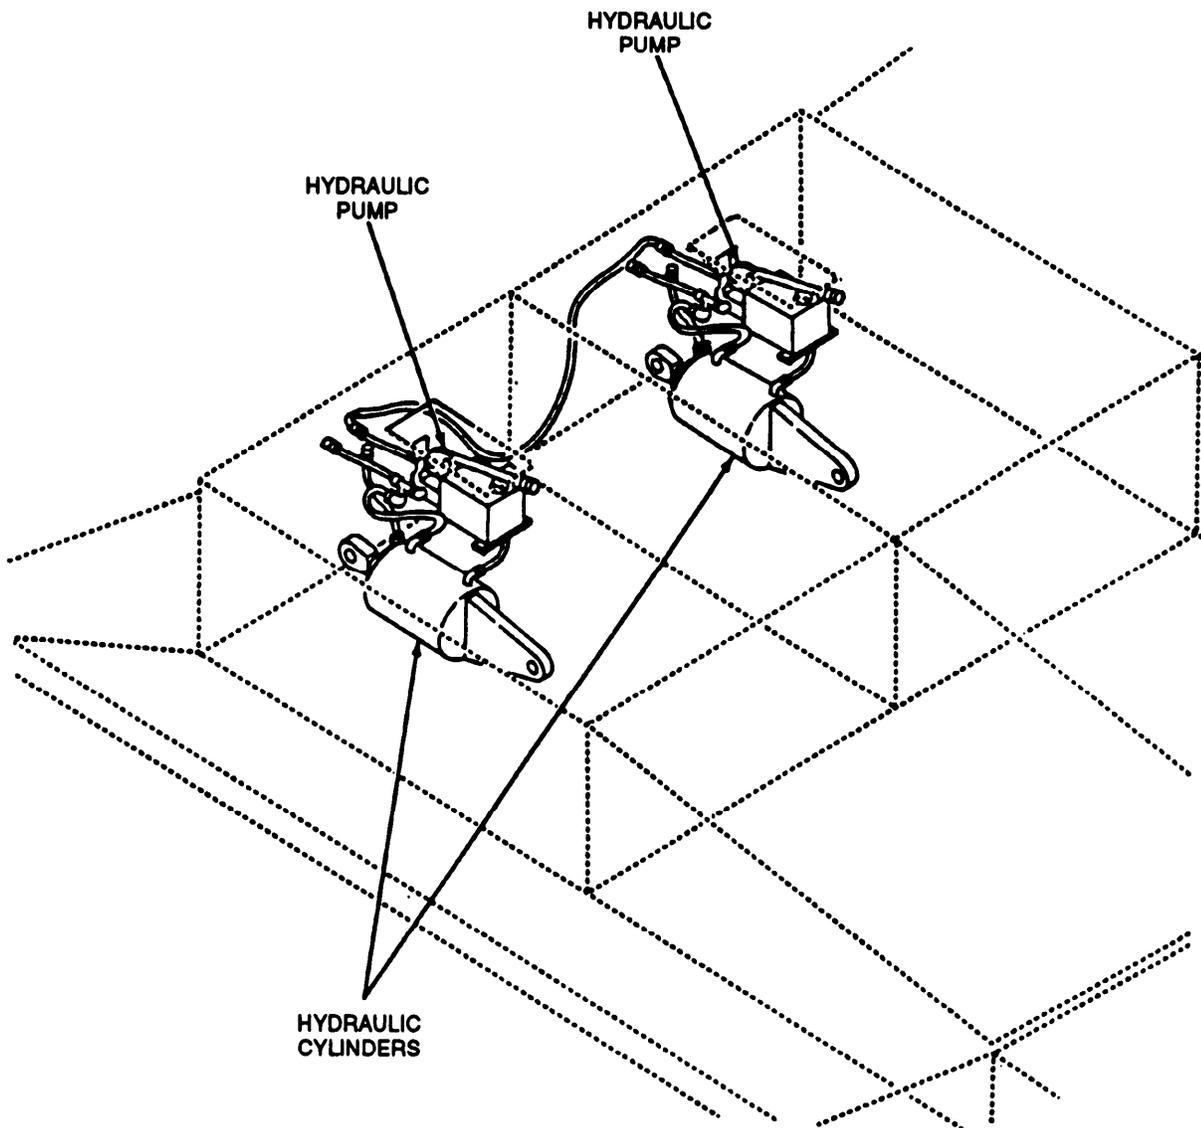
Hose Assembly Connectors, Clamps, Fittings and Rope, Replace.
